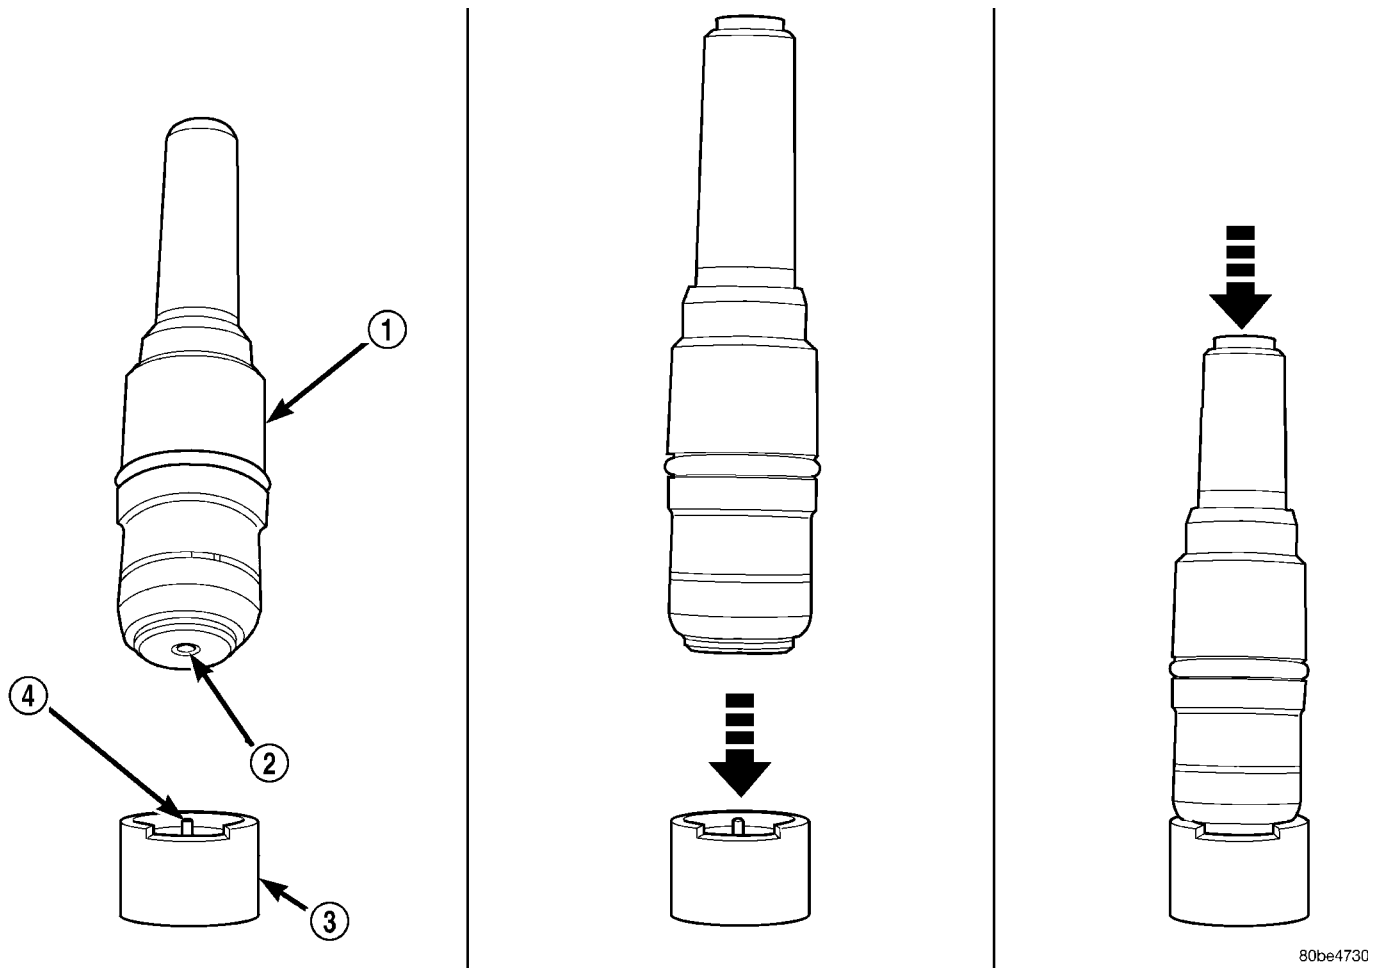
TIMING CHAIN TENSIONER - OIL PURGING
